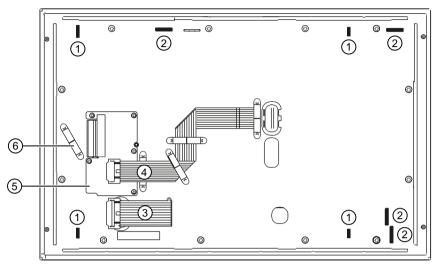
Dimension sheet for attaching the PCU to the OP 012 operator panel front
